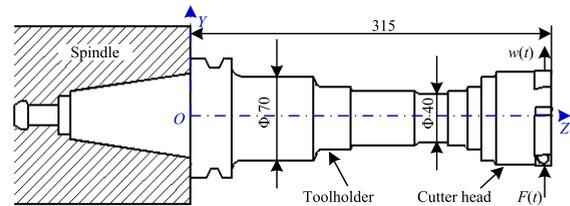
Schematic diagram of milling cutter. (The dimension units are mm).
